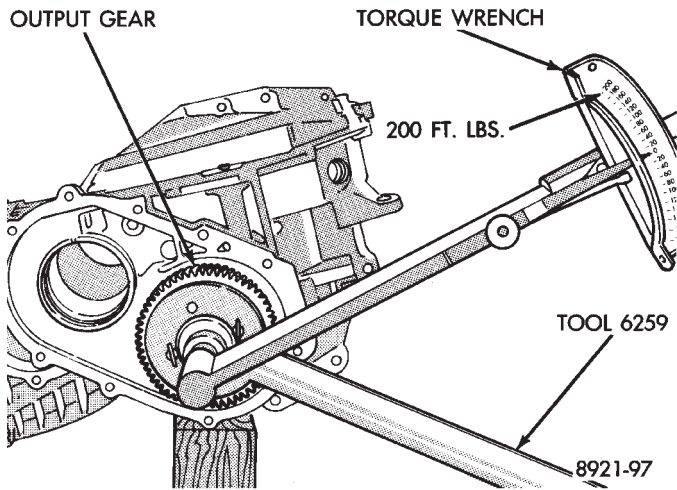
Tighten Output Gear to 271 N-m (200 ft. lbs.)
